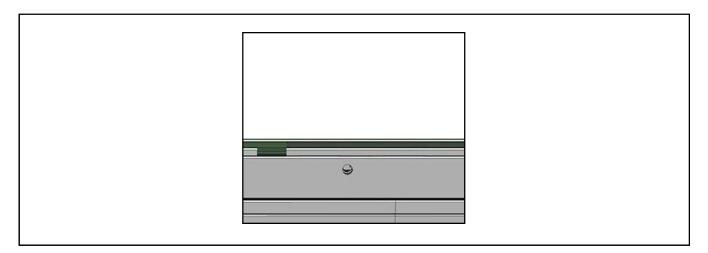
Drill Clearance Hole thru First Wall (Only Bottom Hole is Shown)
